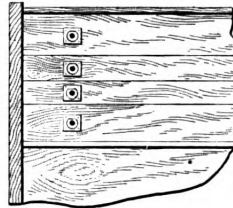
Front View of a Section of the Drawers at End of Chest.
